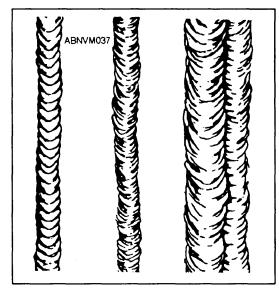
Visual inspection standards for GTA welds.
